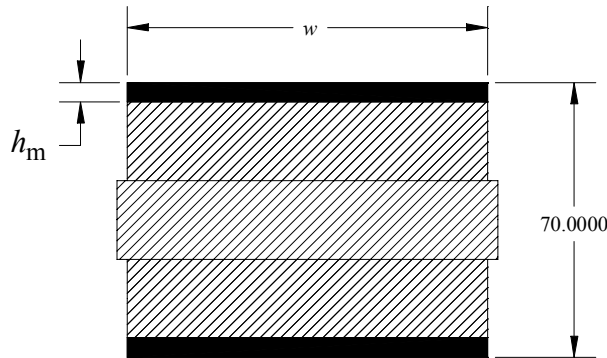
Cross section of rotor pole obtained at external radius of machine.
